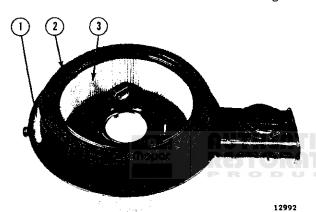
DRY-TYPE AIR CLEANER DAUNTLESS V-6 ENGINE
